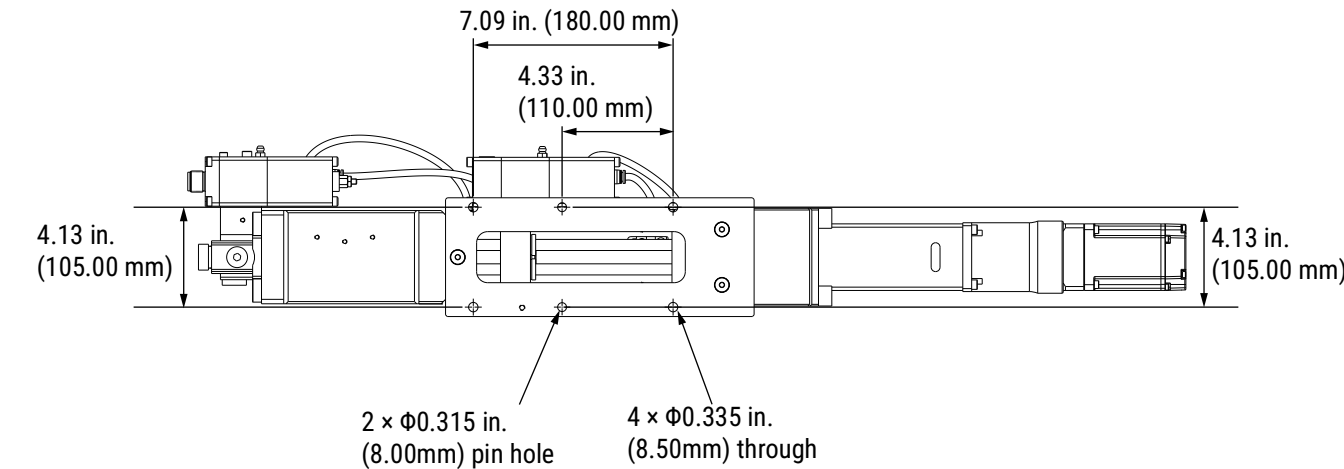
Mounting Hole Dimensions for Installing the PSM Ambient Metering Unit - 200cc
